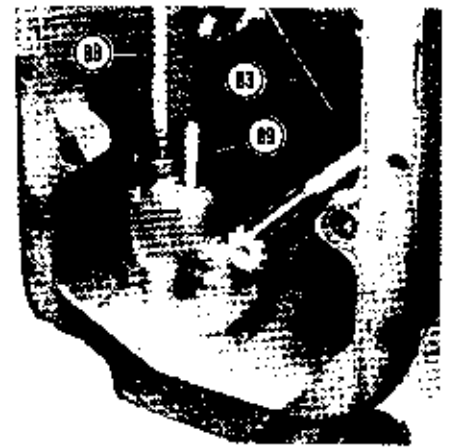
View showing location of system relief valve (89), and hydraulic pressure tube (88). Oil level dip stick is at (83). Relief valve baffle is not shown.
